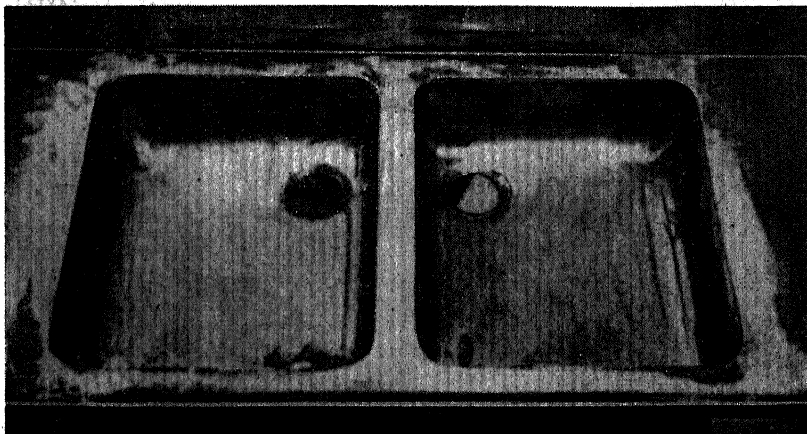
Twin-bowl kitchen sink, 12 ft. long, fabricated of monel metal by electric arc welding.
